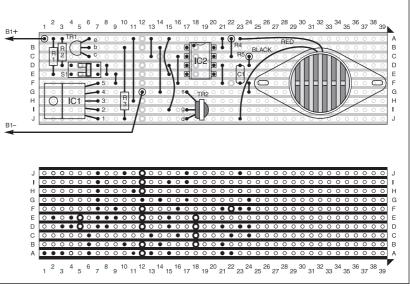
Fridge/Freezer Alarm stripboard component layout and details of breaks required in the underside copper tracks.
